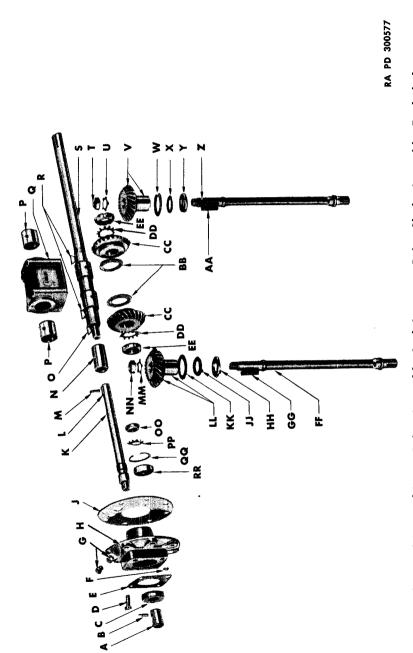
Fuel Pump Drive Assembly And Accessory Drive Shaft Assembly, Exploded
